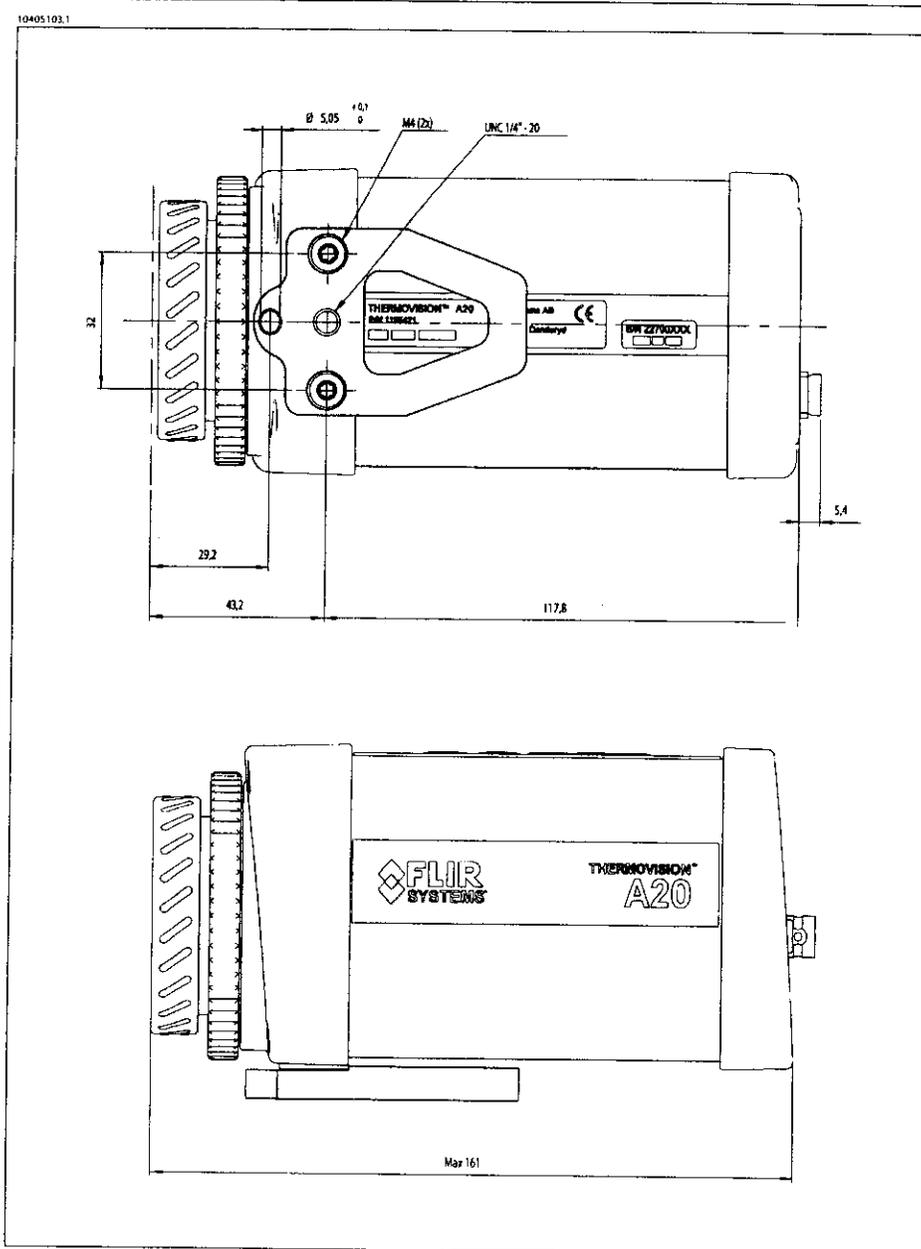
Overall dimensions of the camera, with 25° IR lens
